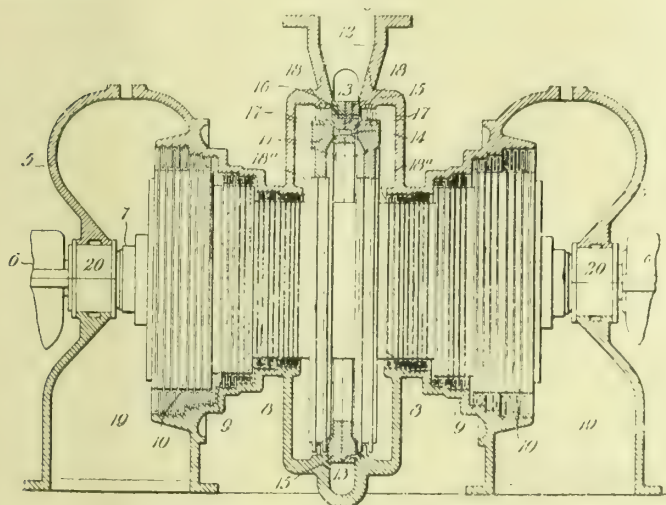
WESTINGHOUSE STEAM TURBINE.
